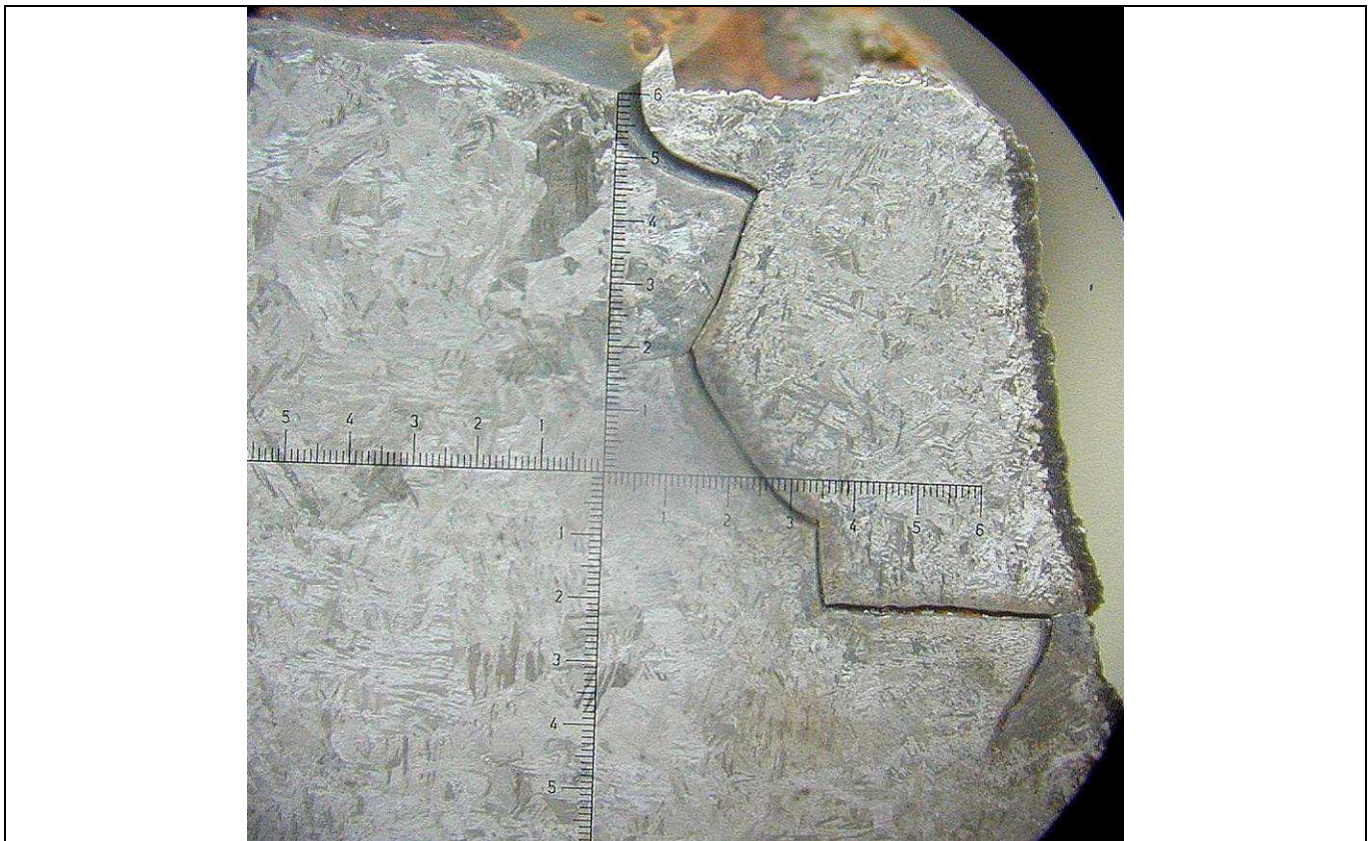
Crack starting at fatigue crack surface, mag. 20x
